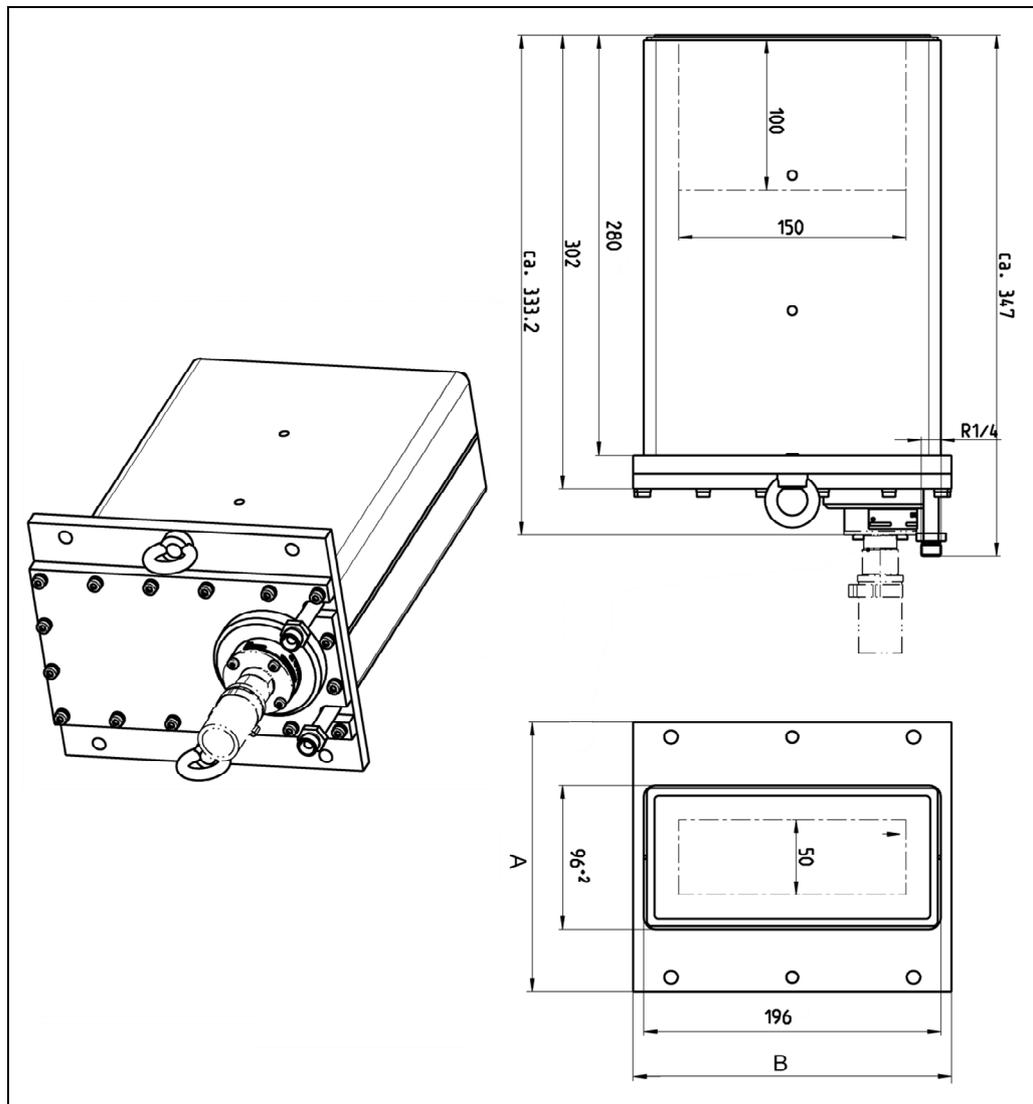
GAMMAcast detector LB 6739 and LB 6750, dimensional drawing without water cooling system
